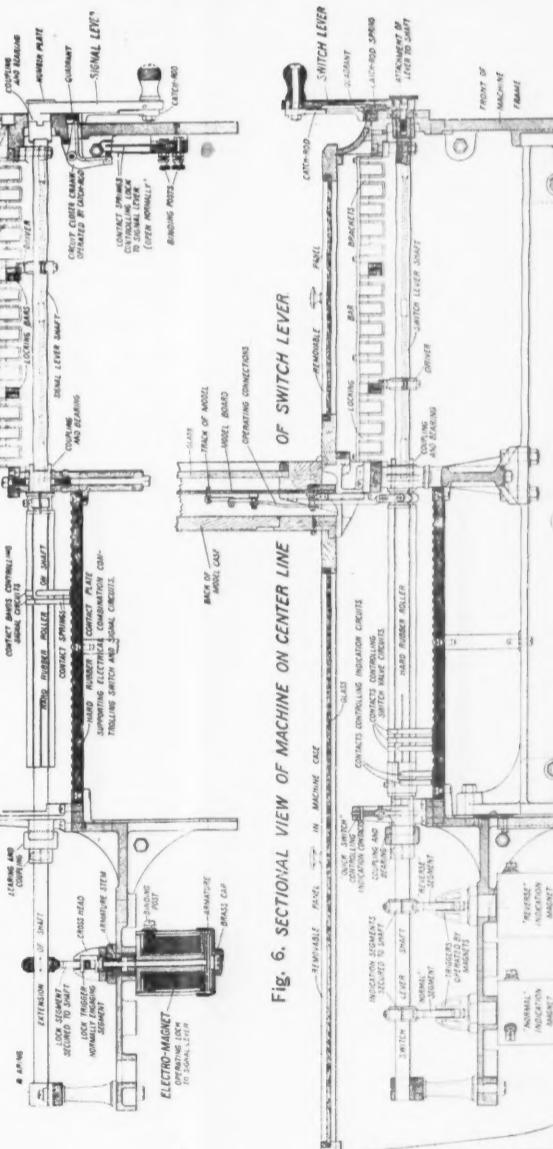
SECTIONAL VIEW OF MACHINE ON CENTER LINE OF SWITCH LEVER.
